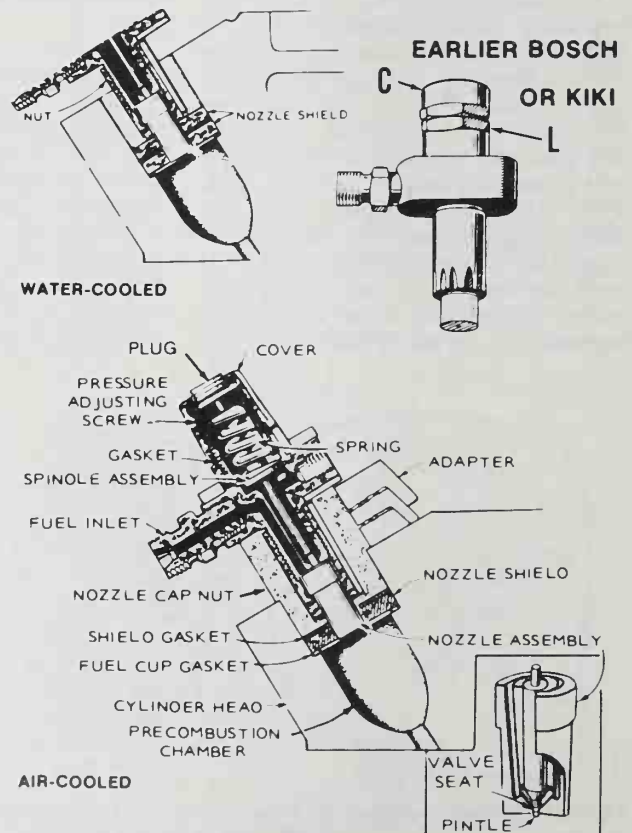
Views of injector assemblies. On later Bosch injector, a plug is unscrewed for access to pressure adjusting screw. On Kiki and early Bosch injectors, cover (C) must be removed for access to pressure adjusting screw.
